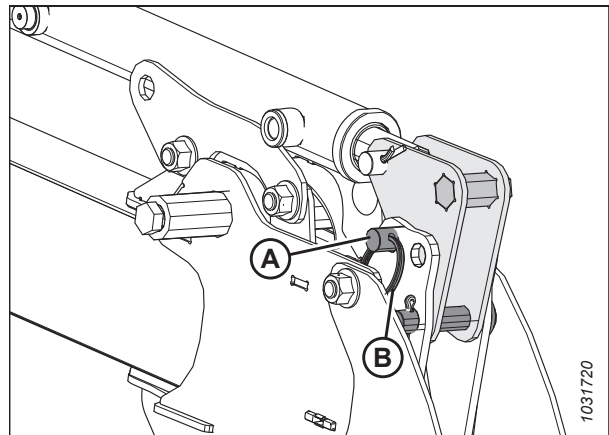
Fore-Aft Cylinder Adjustment Type 1 – Aft Position
